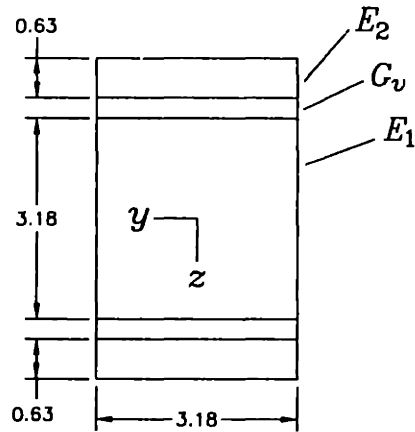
Cross-section of an aluminum sandwich beam: The beam is 0.914 m long, and made up of solid aluminum bars bonded with a thin layer of epoxy to the intervening layers of EAR C-3102 damping foam. Dimensions are in cm.
